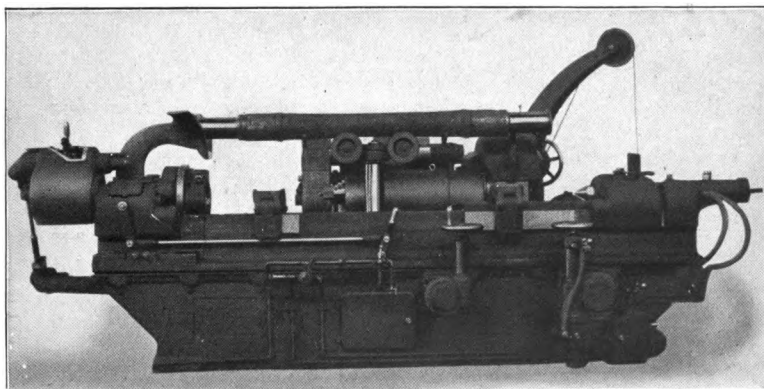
Axles Raised by Compressed Air and Ready for Turning
